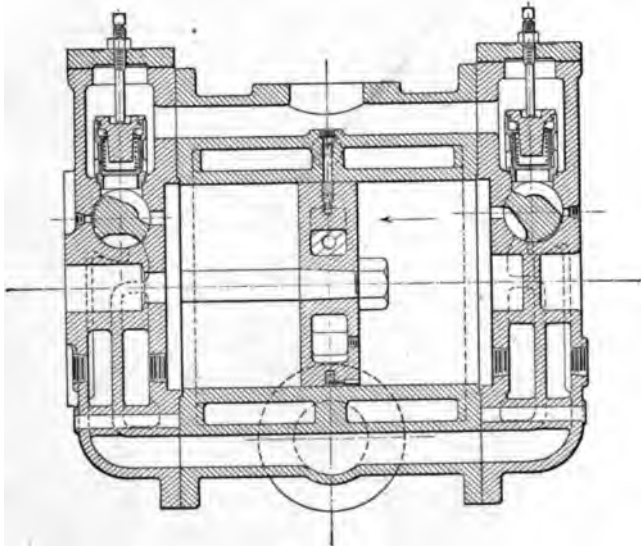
“Cincinnati” Valve Gear, Laidlaw-Dunn-Gordon Compressor.
